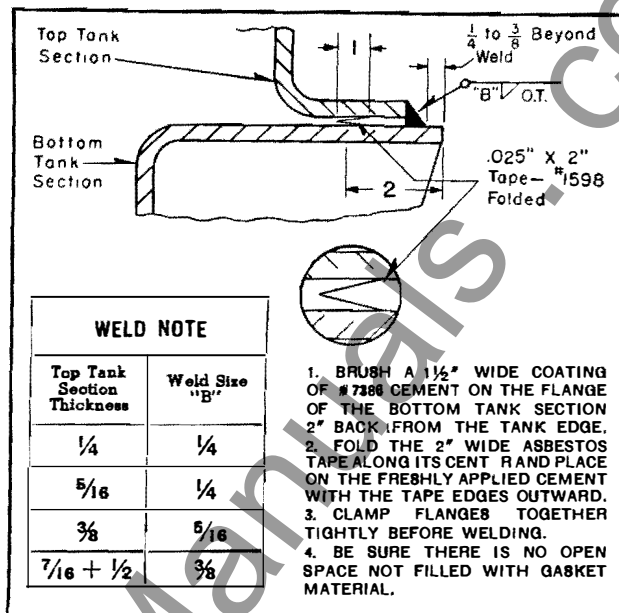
Joining of Flanges, "Form-Fit" Tank
